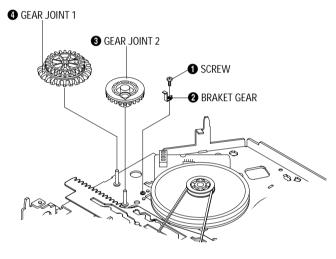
Bracket Gear, Gear Joint 1,2 Removal
